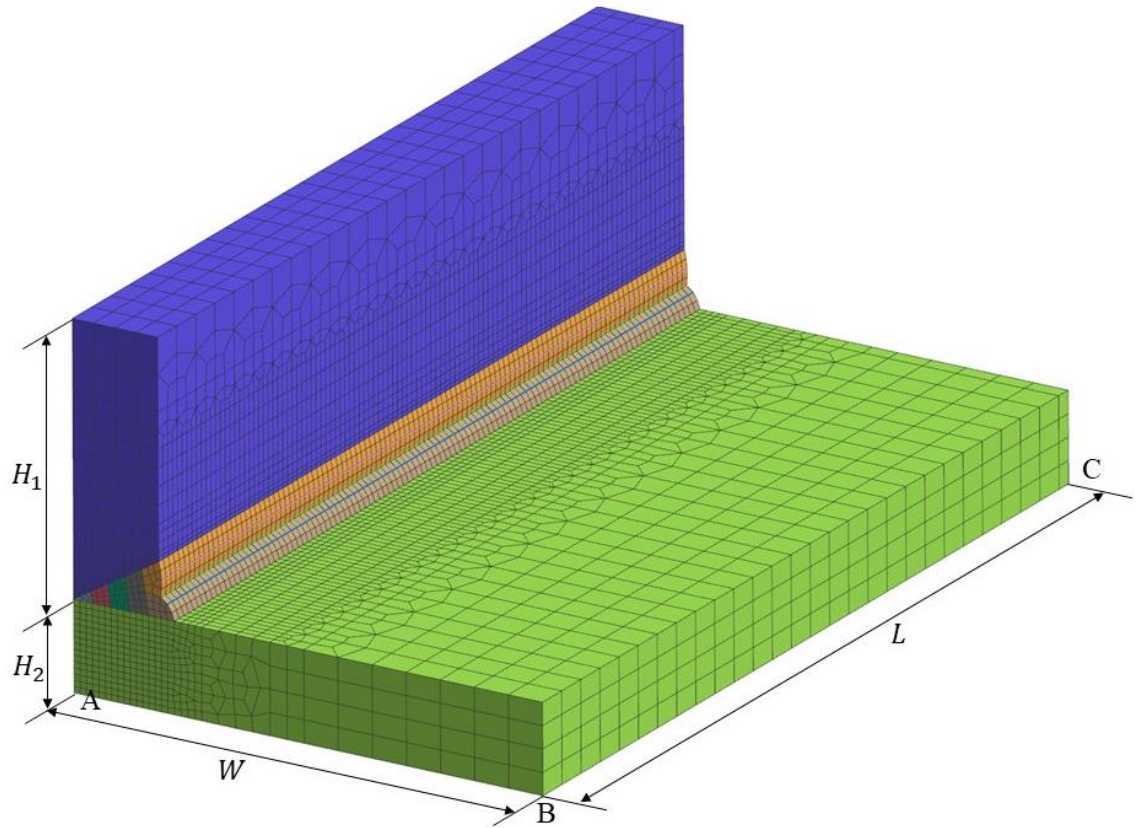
FE Model with Dimensions and Boundary Conditions of Multi-pass Welding
